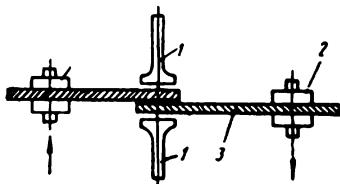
Position of solder and the parts to be soldered (plates) in resistance-heating units; the clamping devices are insulated: 1-clamping; 2-current-feeding terminals; 3-the work to be joined.
